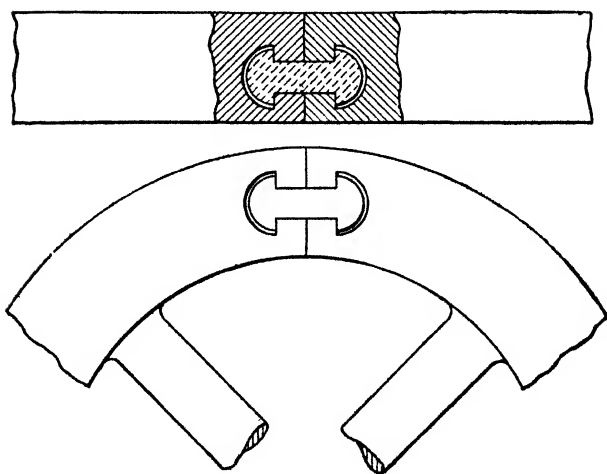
Diagram showing shrunk-link-joint used for holding segments of cast-iron flywheel together.
